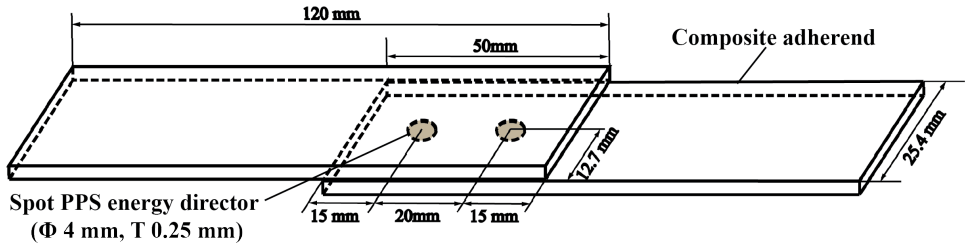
Schematic of the double-spot welded single-lap shear joint configurations. The grey dashed ellipse indicates the location of the spot energy director (PPS, Φ : diameter, T: thickness) and thus the spot weld. Dimensions are not to scale.
